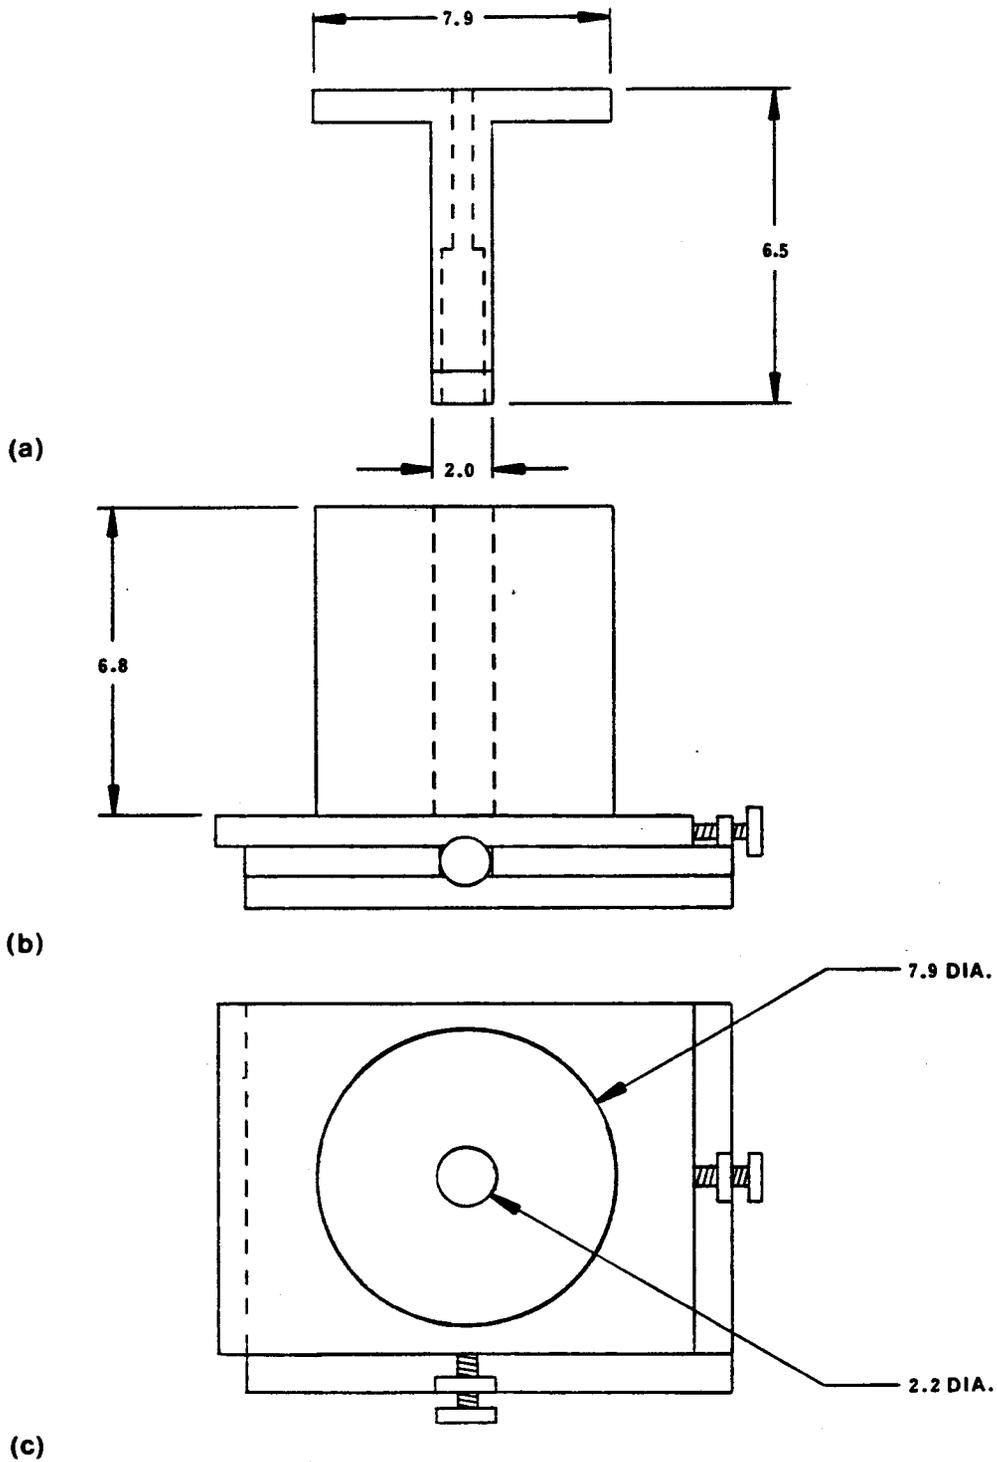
The source holder and collimator. (a) source holder; (b) source holder and sliding bracket (side view); and (c) top view. Dimensions in cm.
